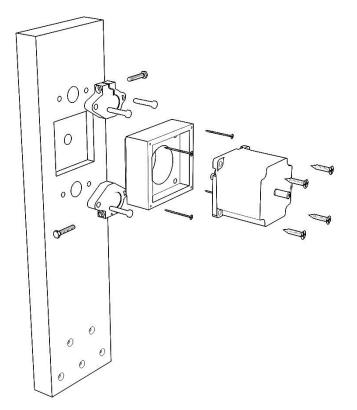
(ADDING THE MOTOR SUPPORT AND MOUNT THE MOTOR)
